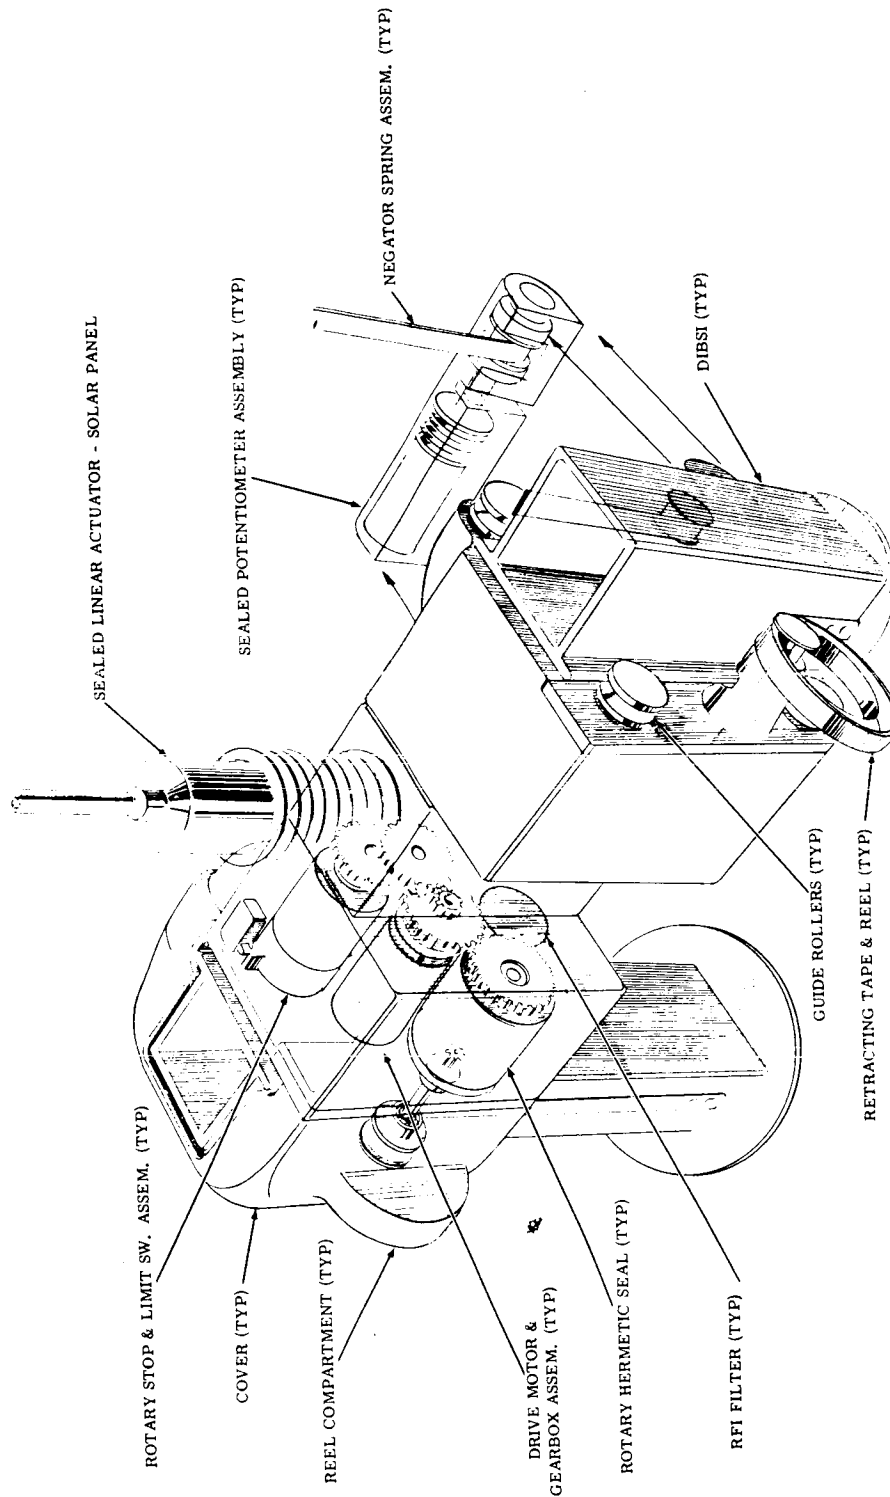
DIBSI Deployment and Solar Panel Actuator Assembly
